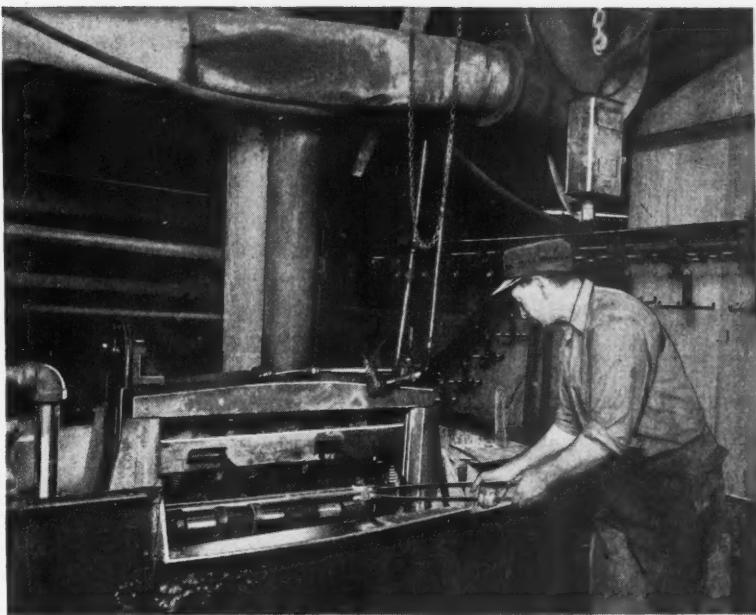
Here the Operator is Shown Placing a Hot Shaft in the Quenching Machine
